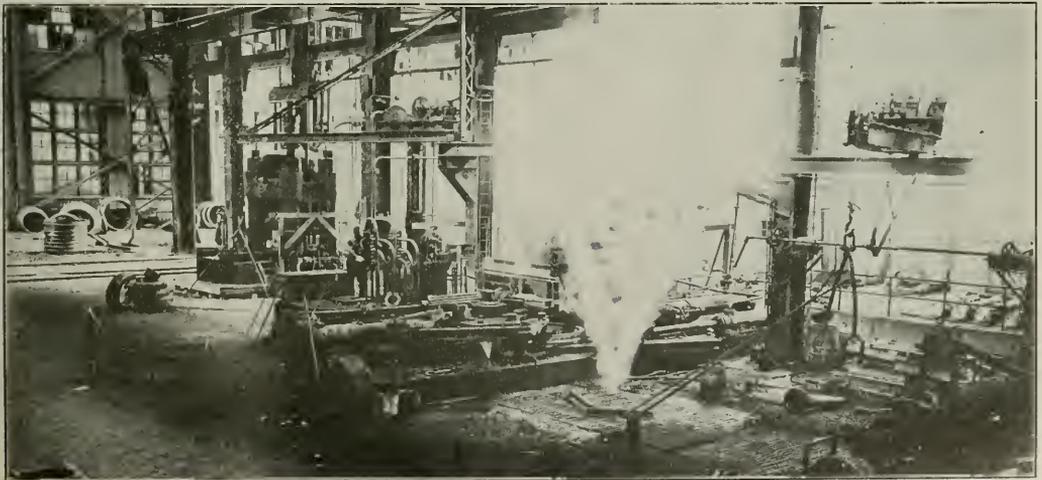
Special Rolling Mill, Driven by 1,000 Hp. Motor, on Which Wheels and Tires Are Made
